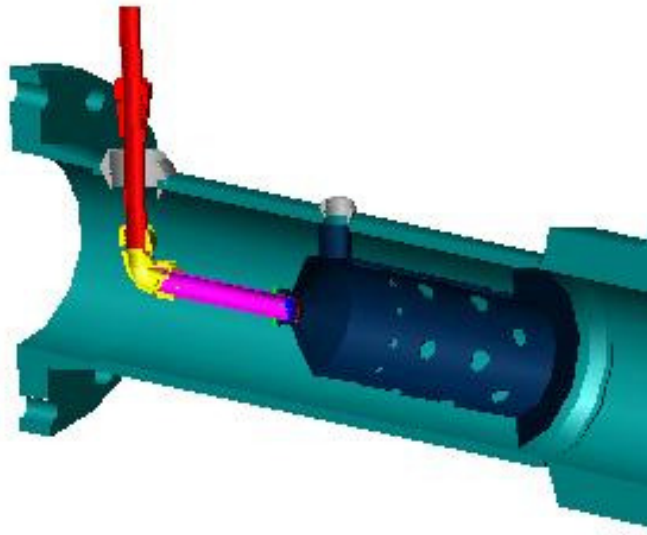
AutoCAD Rendering of the Combustor Canister
